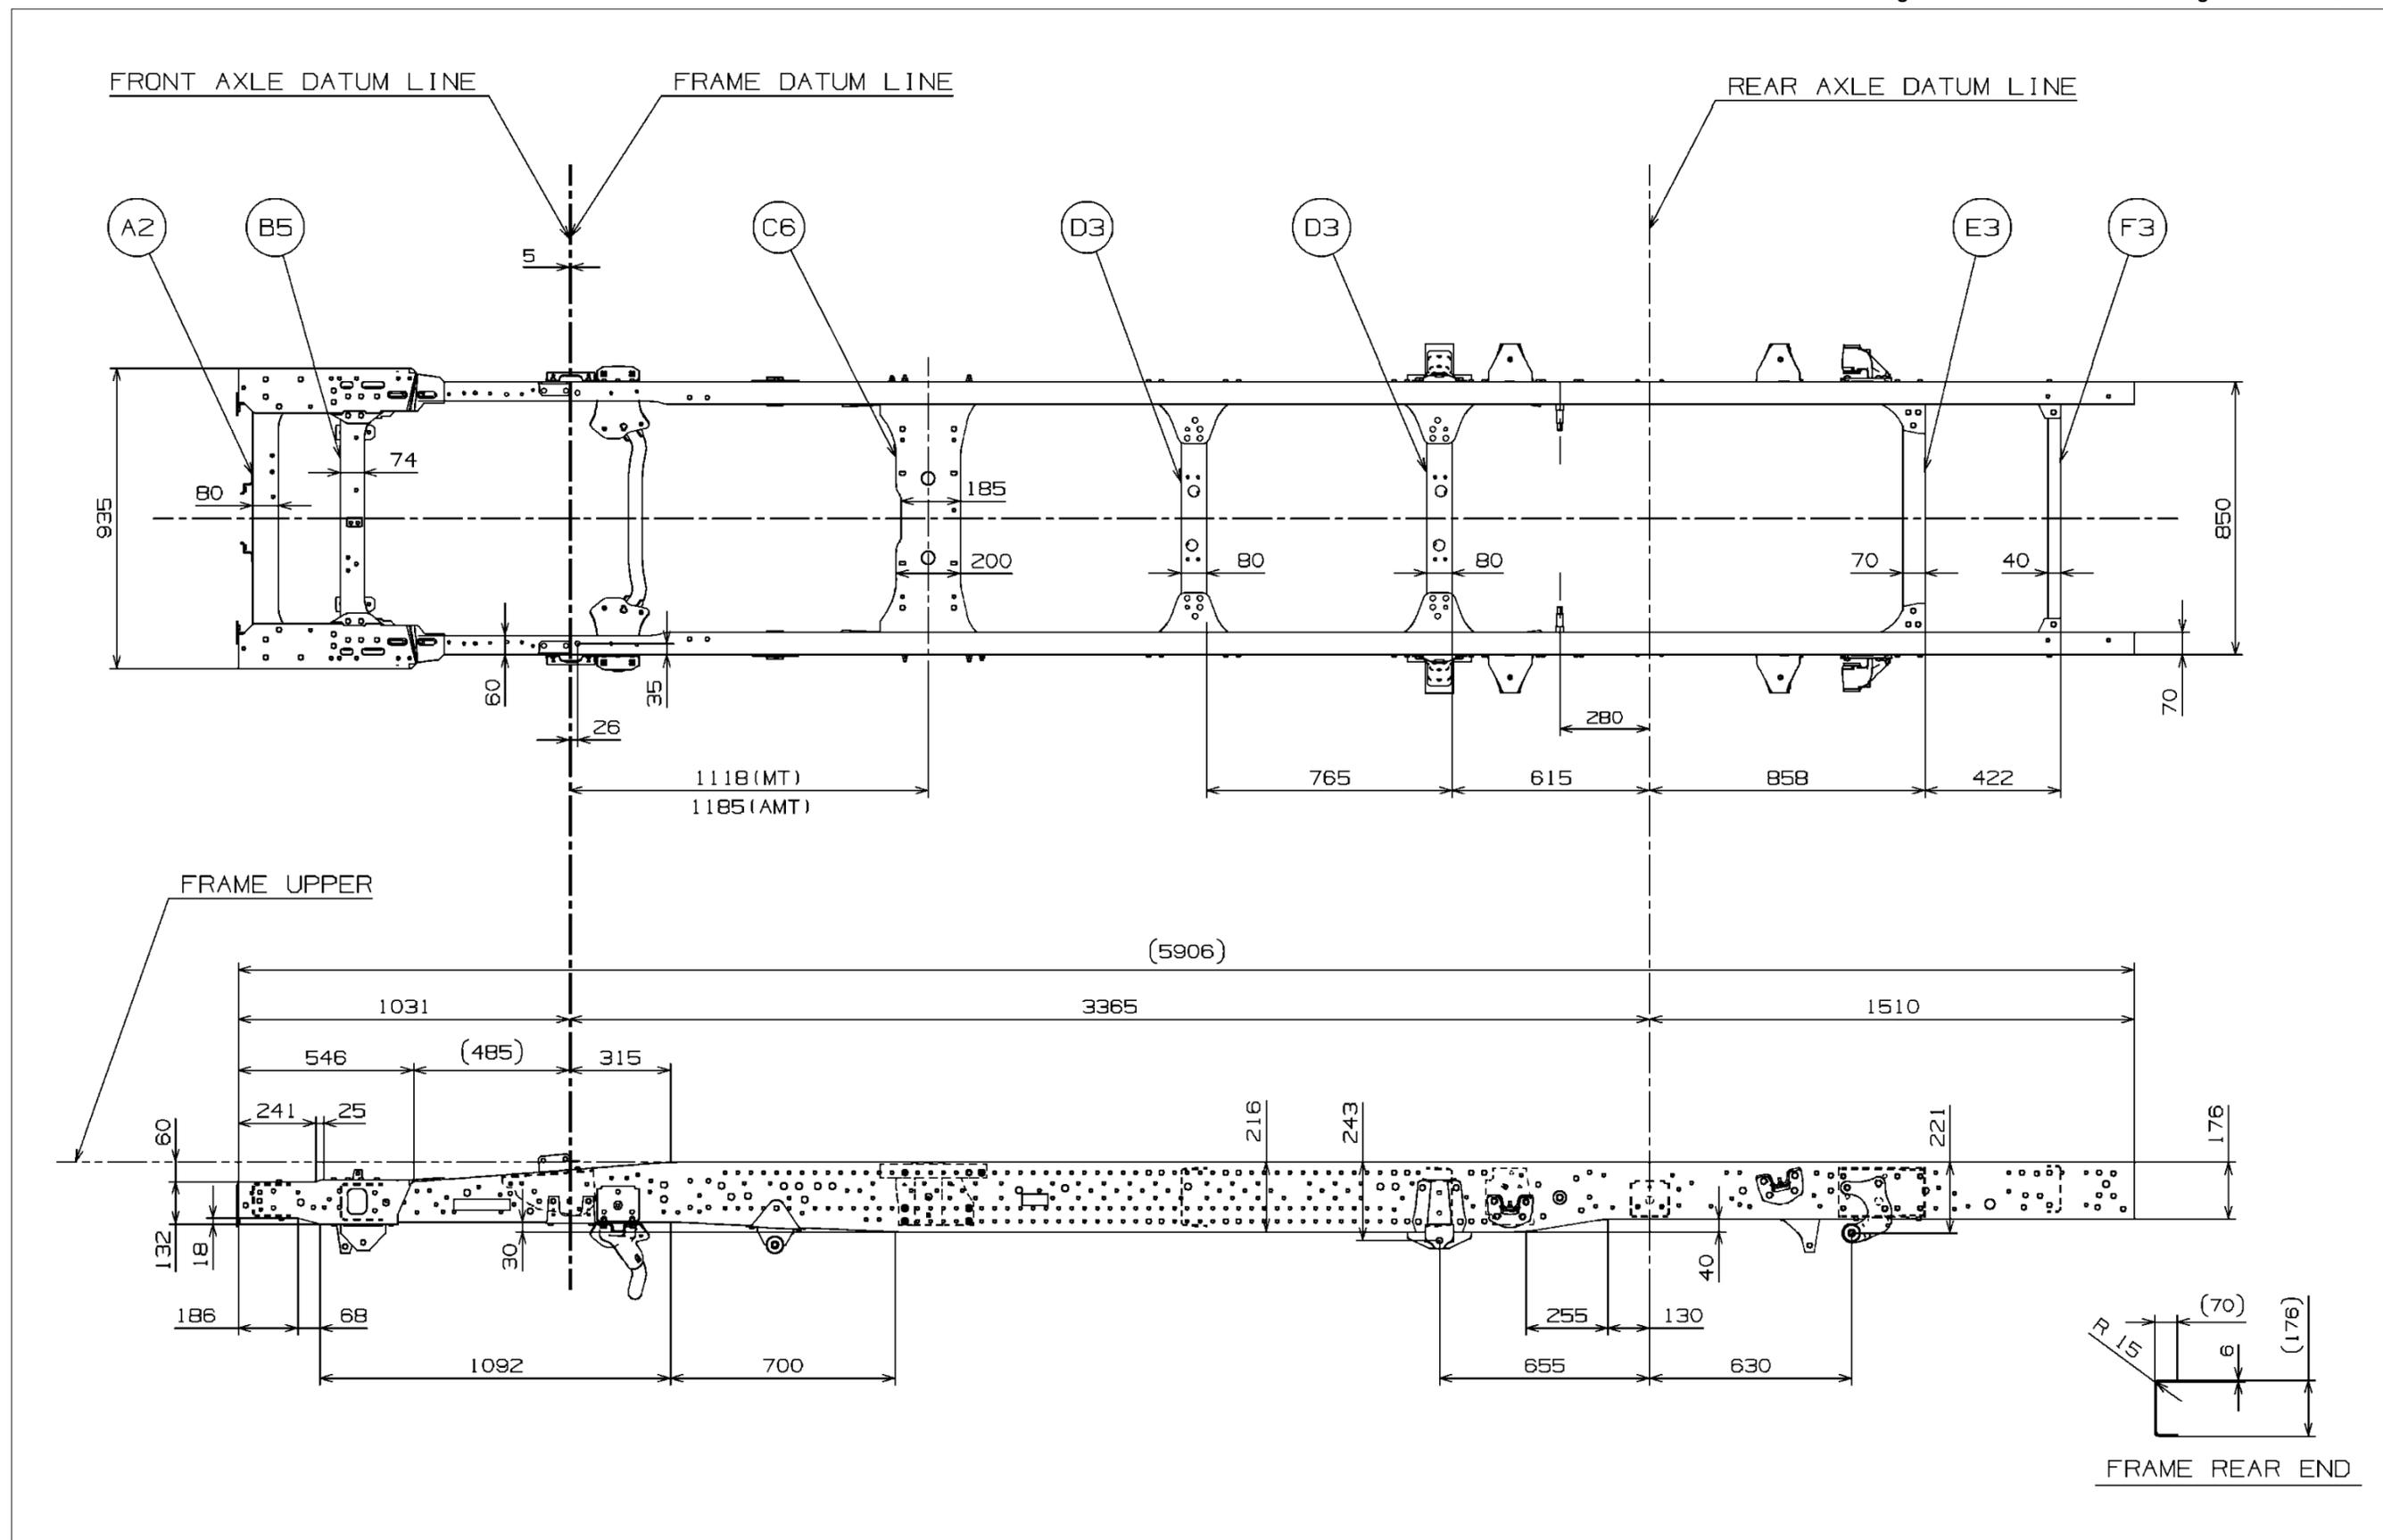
Chassis Frame Drawing NPR75L/U-KL5VAYE
